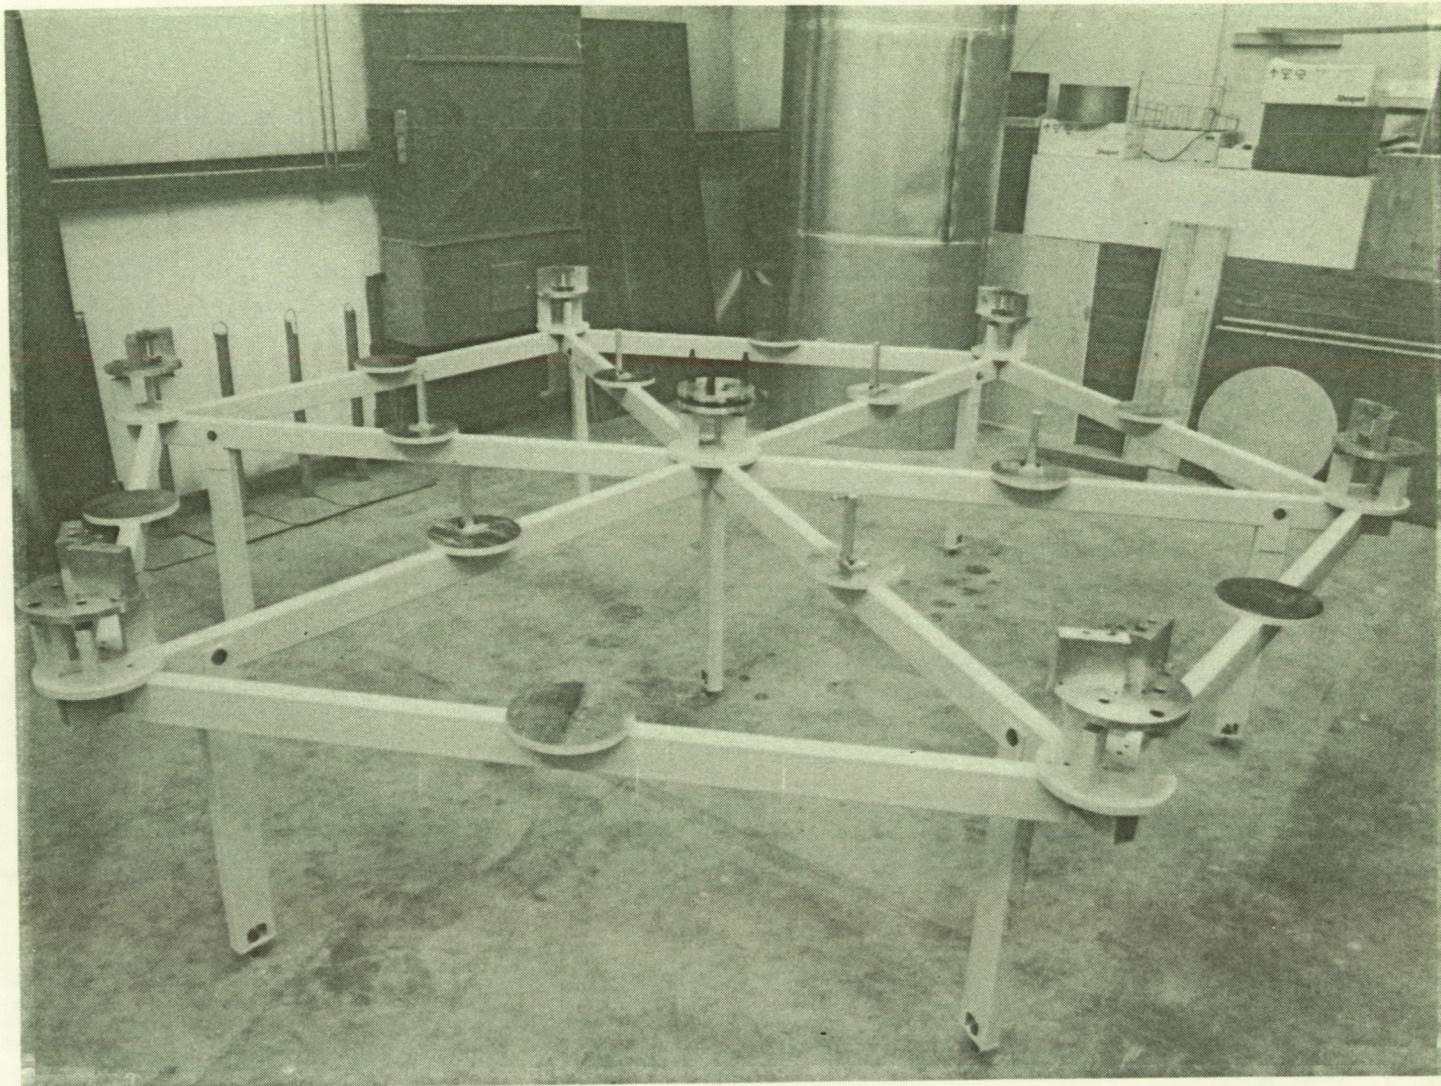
Hexagonal Panel Bonding Fixture Insures Accurate Geometry For The Corner Fittings That Interface With The Latches
